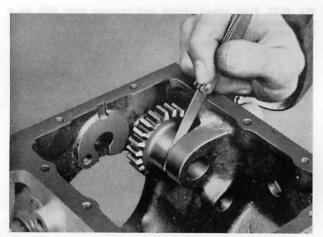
Checking the end float of the reverse pinion (three-speed)
